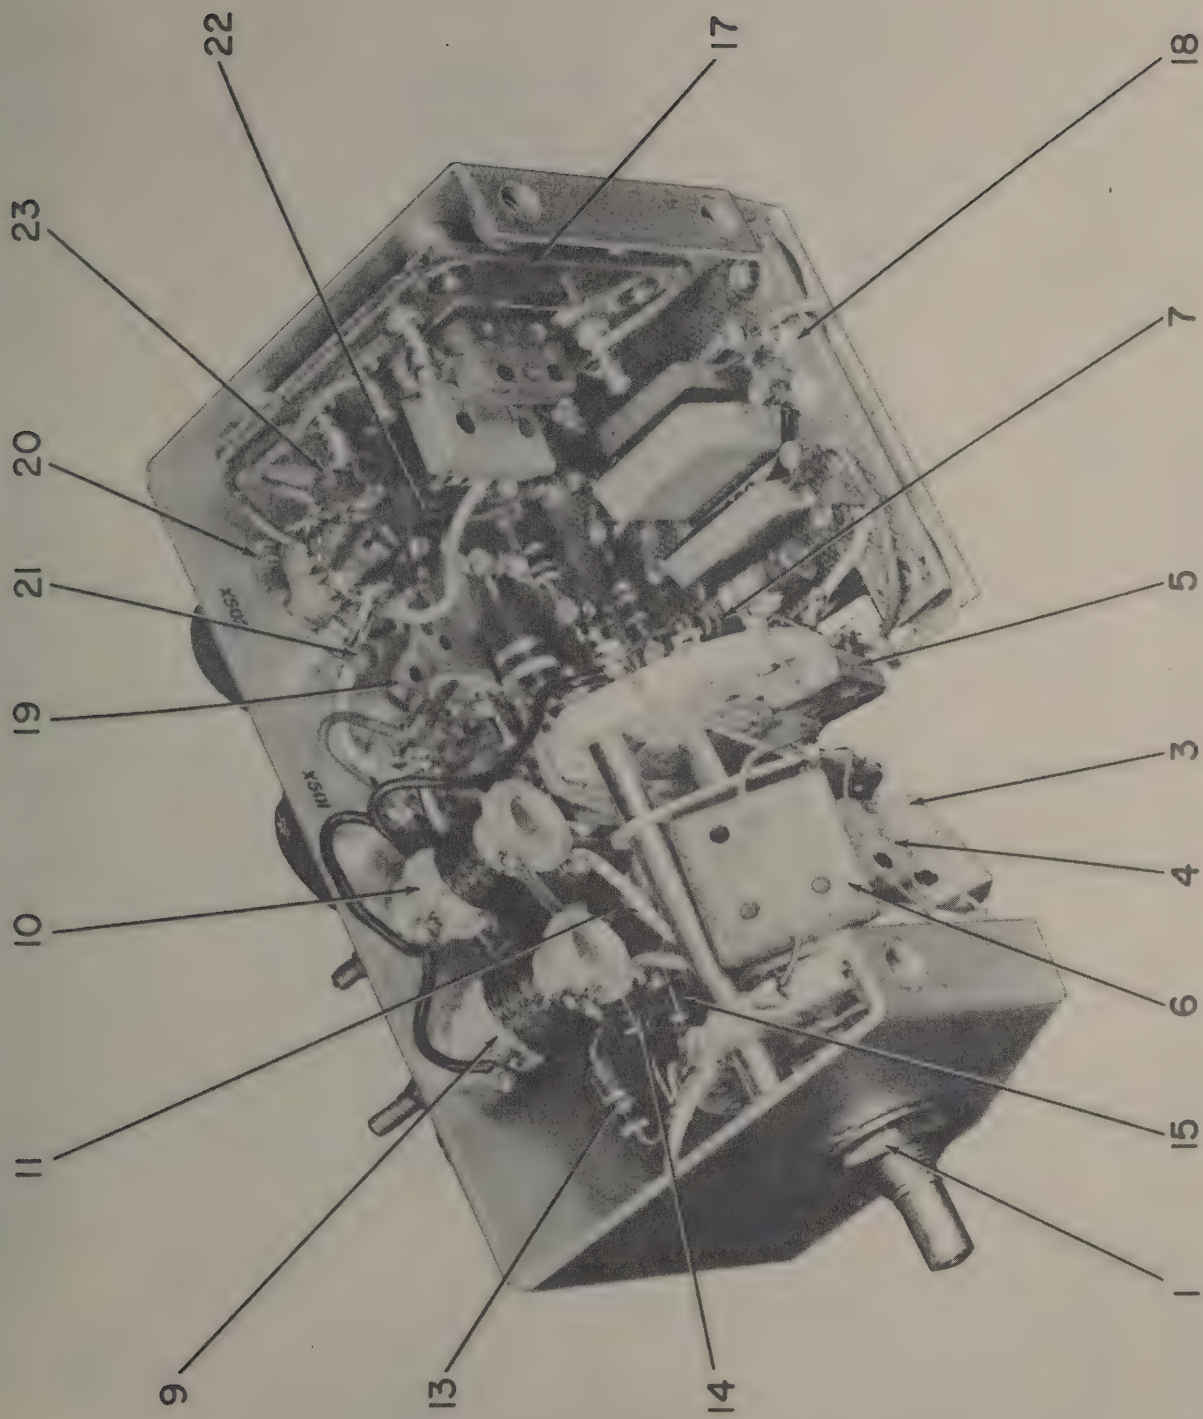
Marker Generator Chassis Assembly-Interior View (Sheet 2 of 2)
